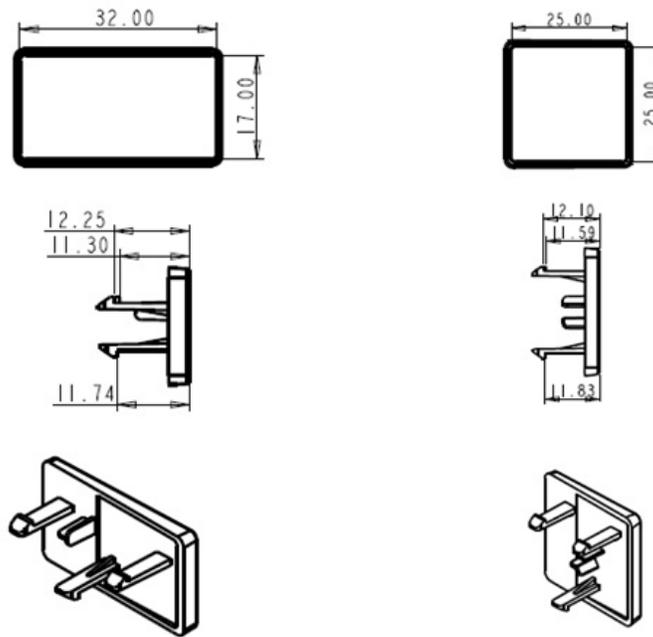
Front Bezel Accessory ID Badge Mechanical Drawings
